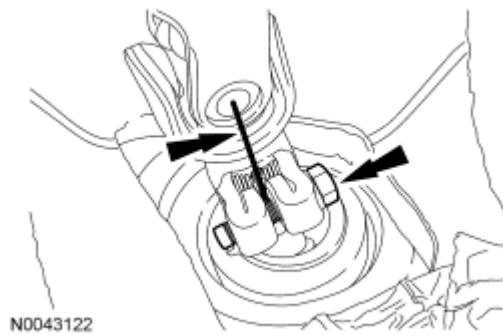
Locating Steering Column Shaft Index Mark And Bolt
